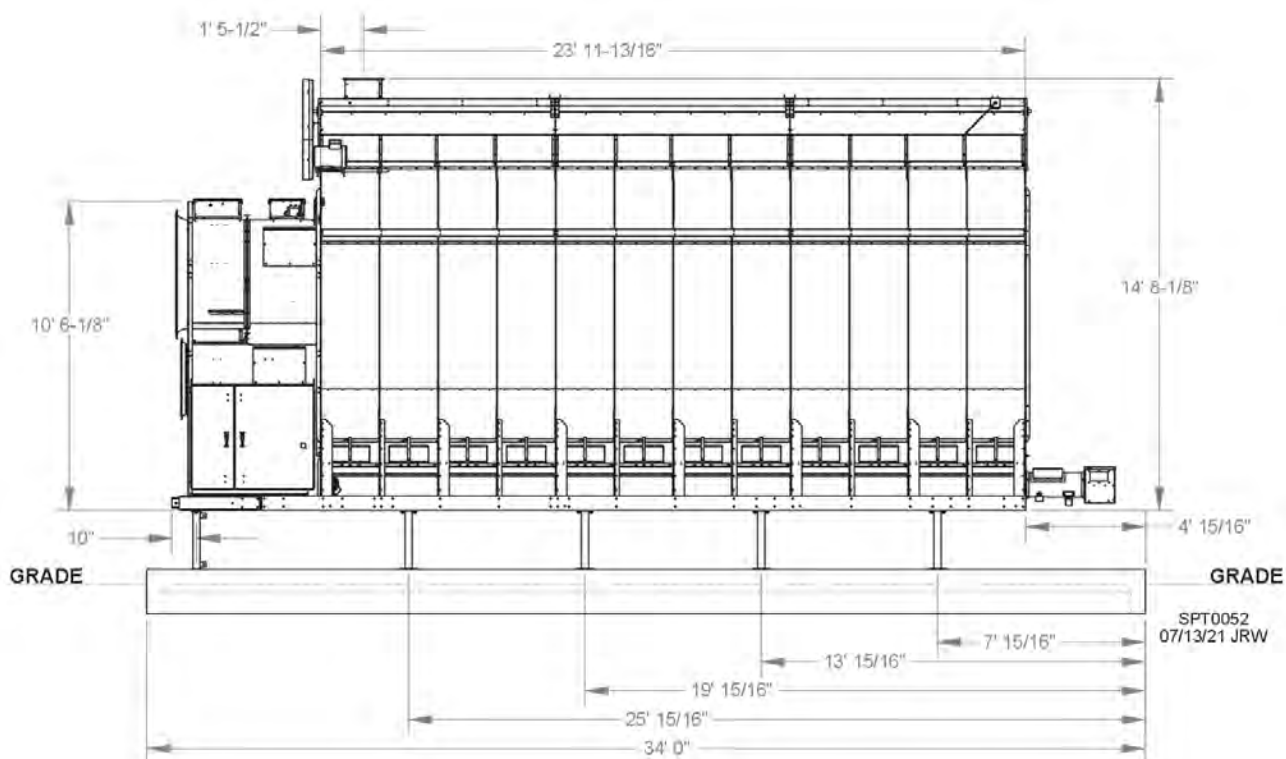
Leg locations & dimensions for 24' axial dryer
